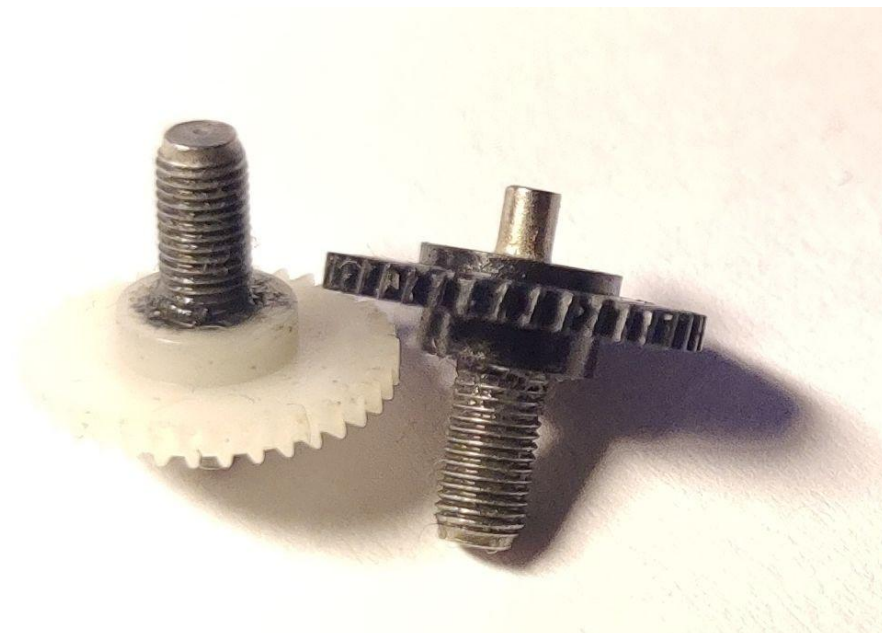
Dynamic Drum gear screws removed. The gears on these gear screws are the most heavily loaded components in DD gearbox, because, when rotated by the gear drive, they tilt the drum and keep it in the last tilted position, but it's actually the fine threads, that keep the position, not the teeth.
